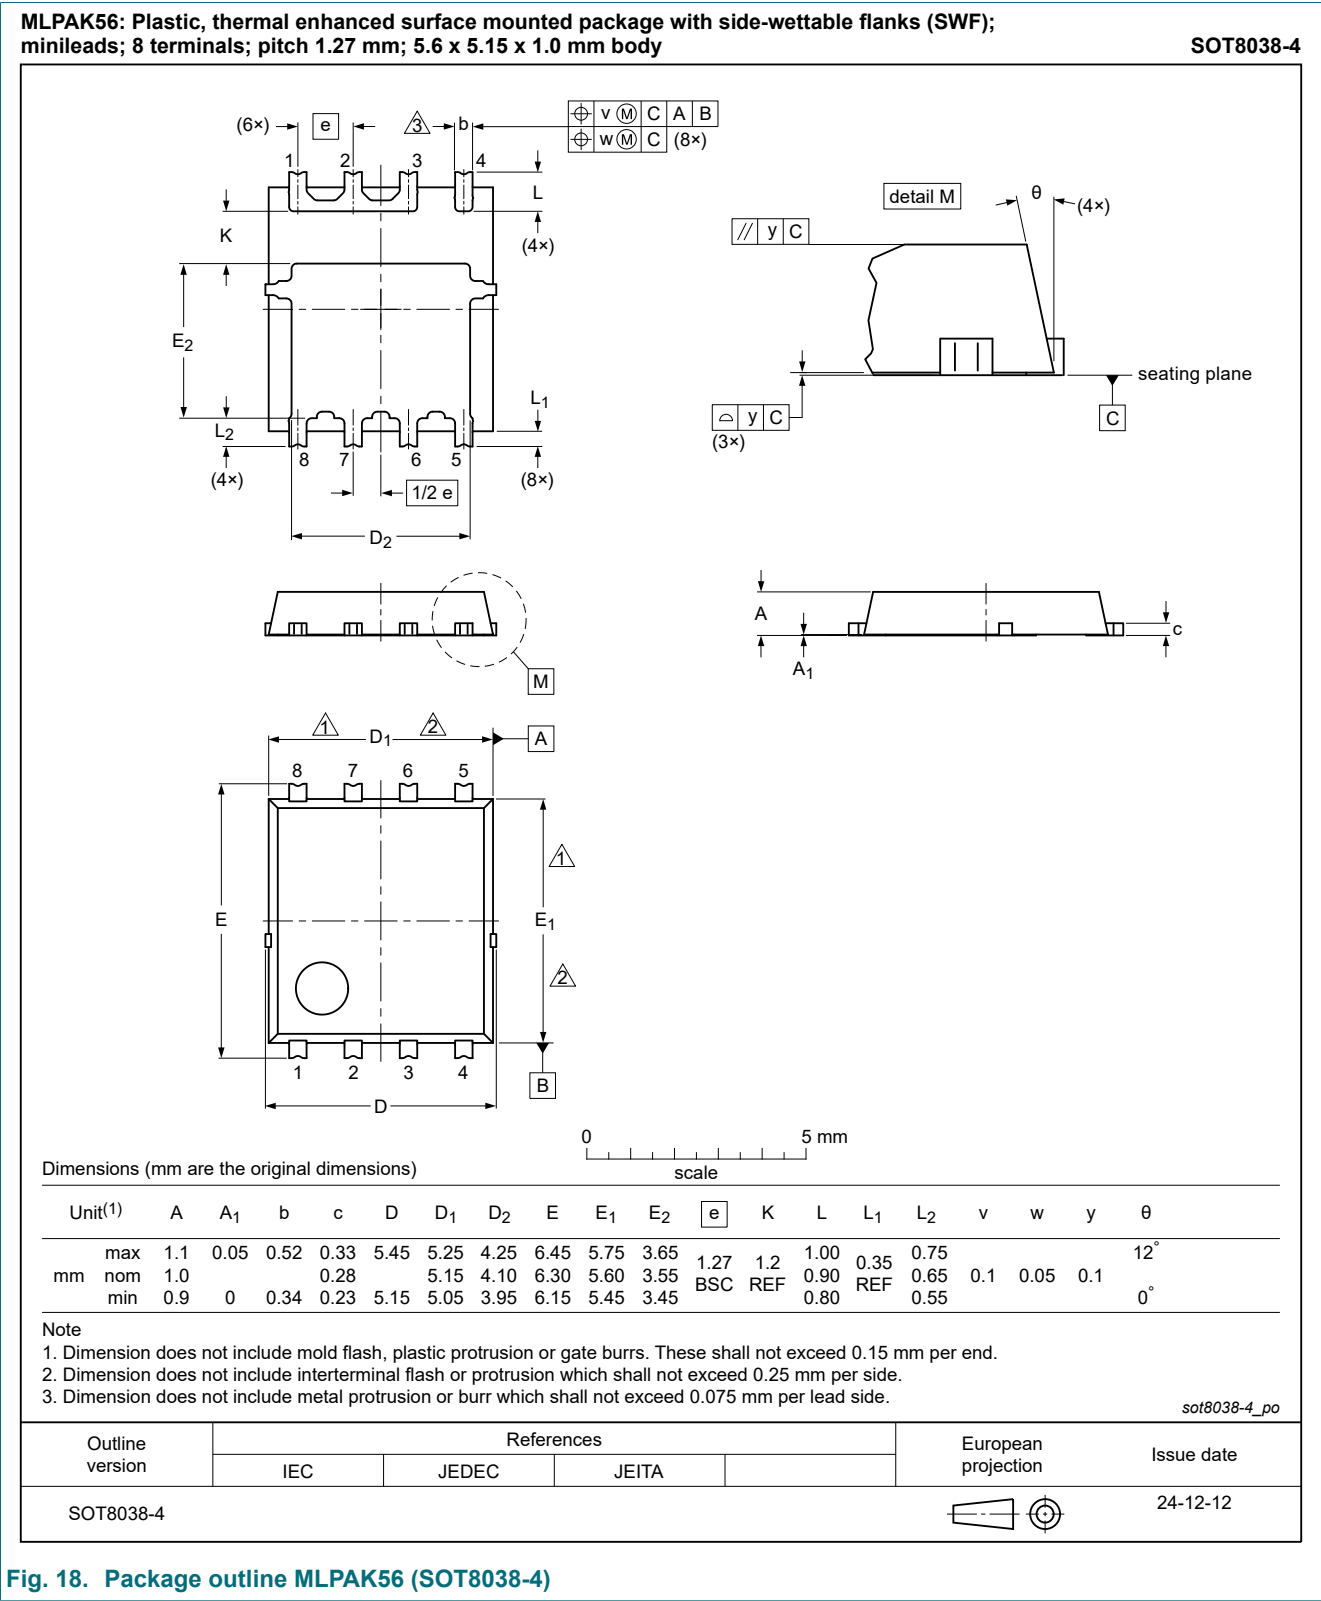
Package outline MLPAK56 (SOT8038-4)
